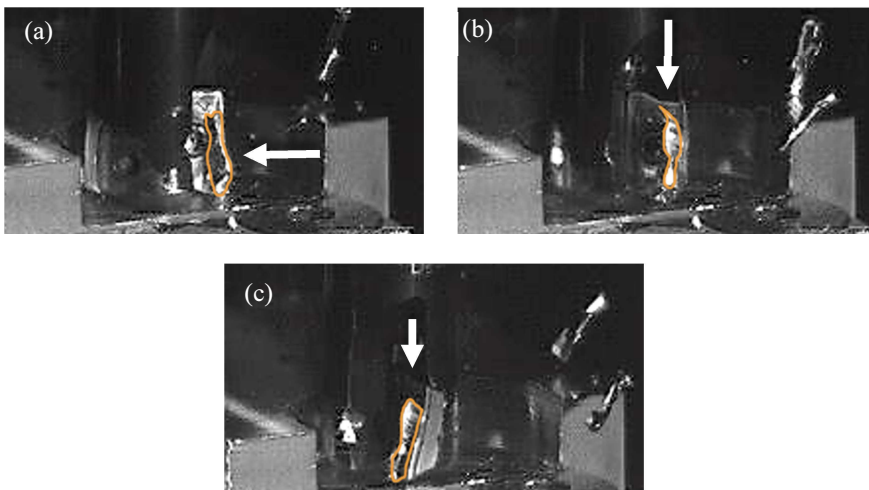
(a) Chip welding to tool inserts causing smearing and notch wear (b) after 45° of rotation (c) after 90° of rotation
